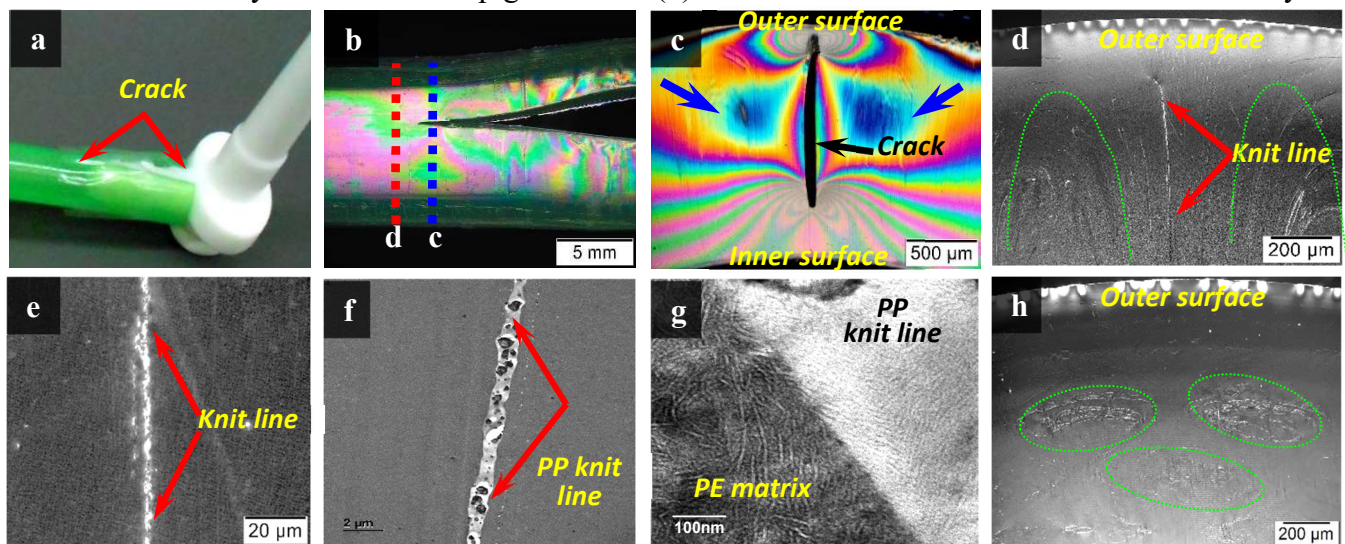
(a) Tubing crack over connector (b) Linear crack and arrest under cross polarized light (CPL) (c) Tubing cross section under CPL showing internal crack and stress fields (d and e) CPL images ahead of a crack arrest showing parabolic flows and knit line (f and g) TEM images of knit line morphology and interfacial boundary (h) CPL image of control tubing cross section showing oval flow patterns.
